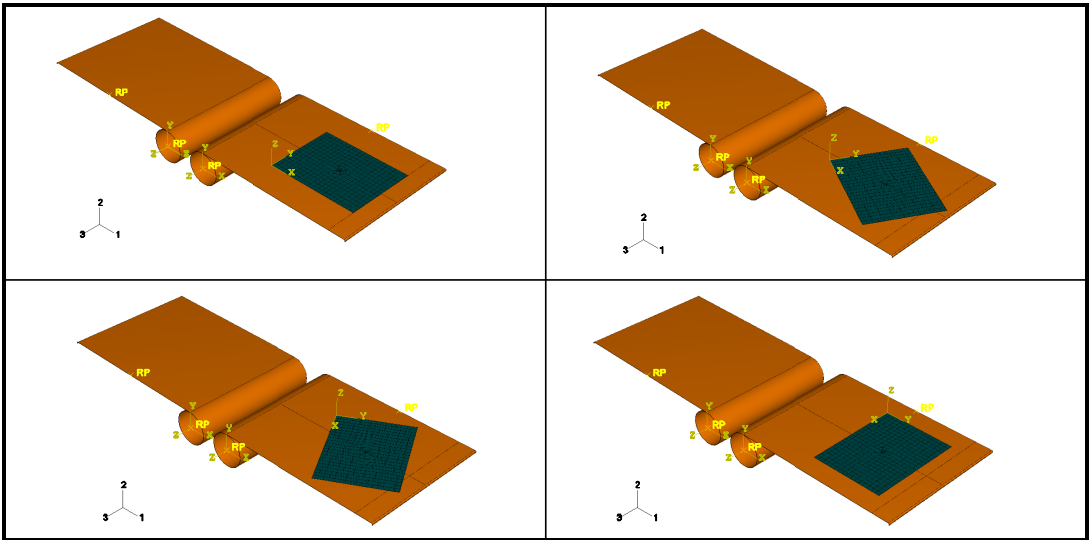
Paper sample with its machine direction oriented at 0° , 30° , 60° , 90° to the conveyor travel direction.
